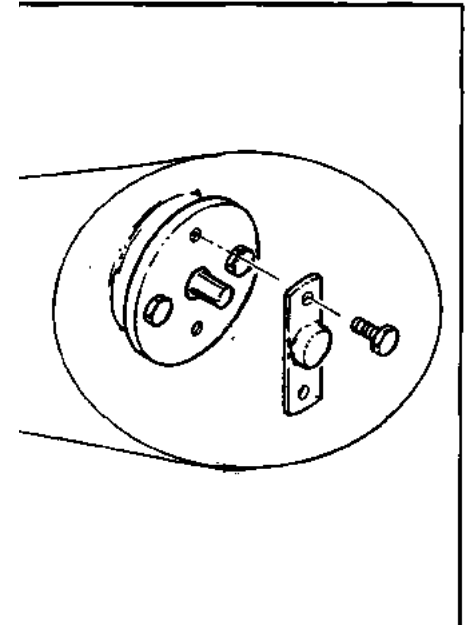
Each rear wheel torque hub must be disengaged before sweeper can be towed. Remove towing plate and remount with dimple facing inward disengaging torque hub.
